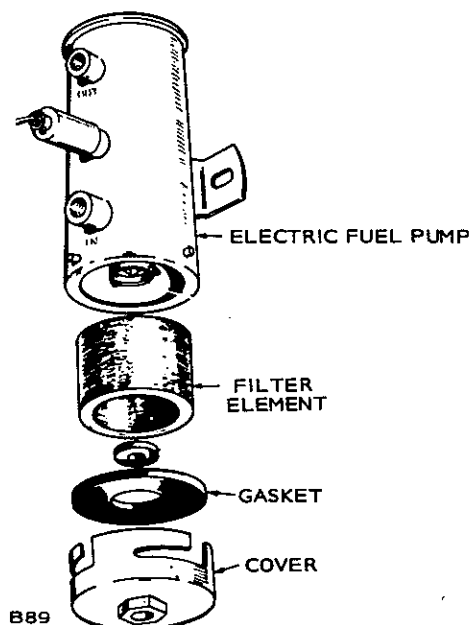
FUEL PUMP FILTER ELEMENT
